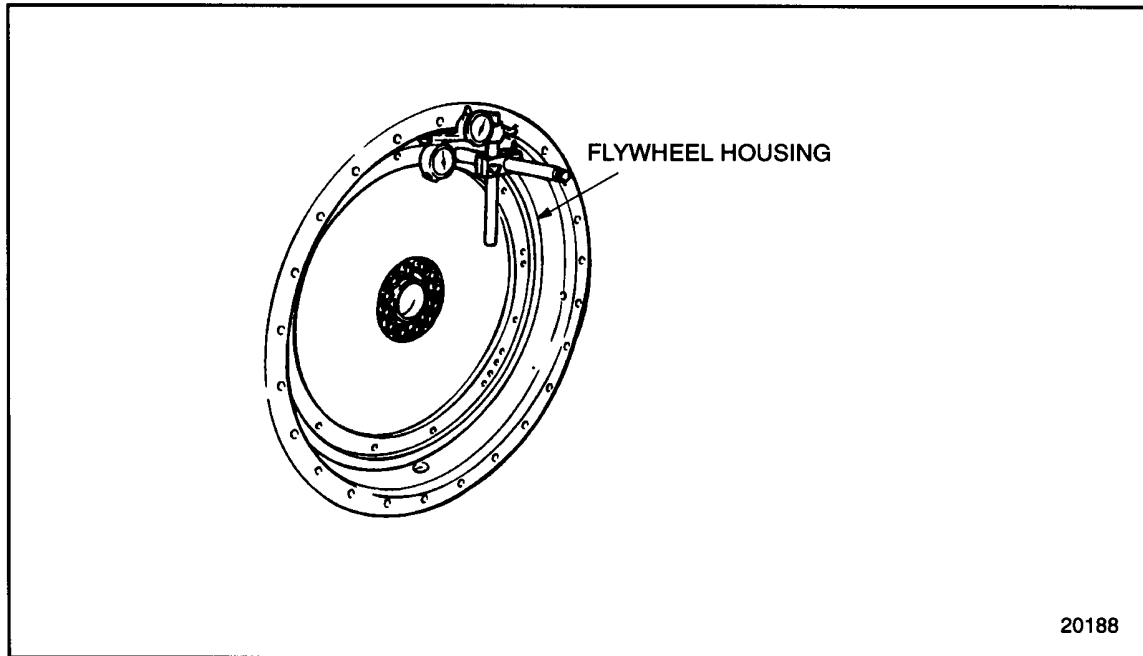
Measuring Flywheel Housing Bore Concentricity and Bolting Flange Run-out
